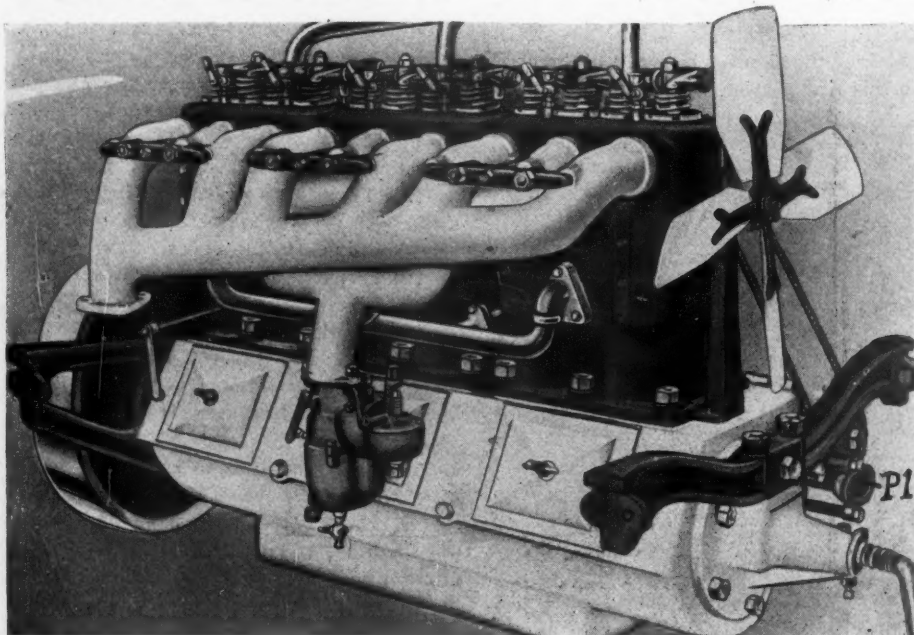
STANDARD CAR USES ONE-PIECE CRANKCASE
